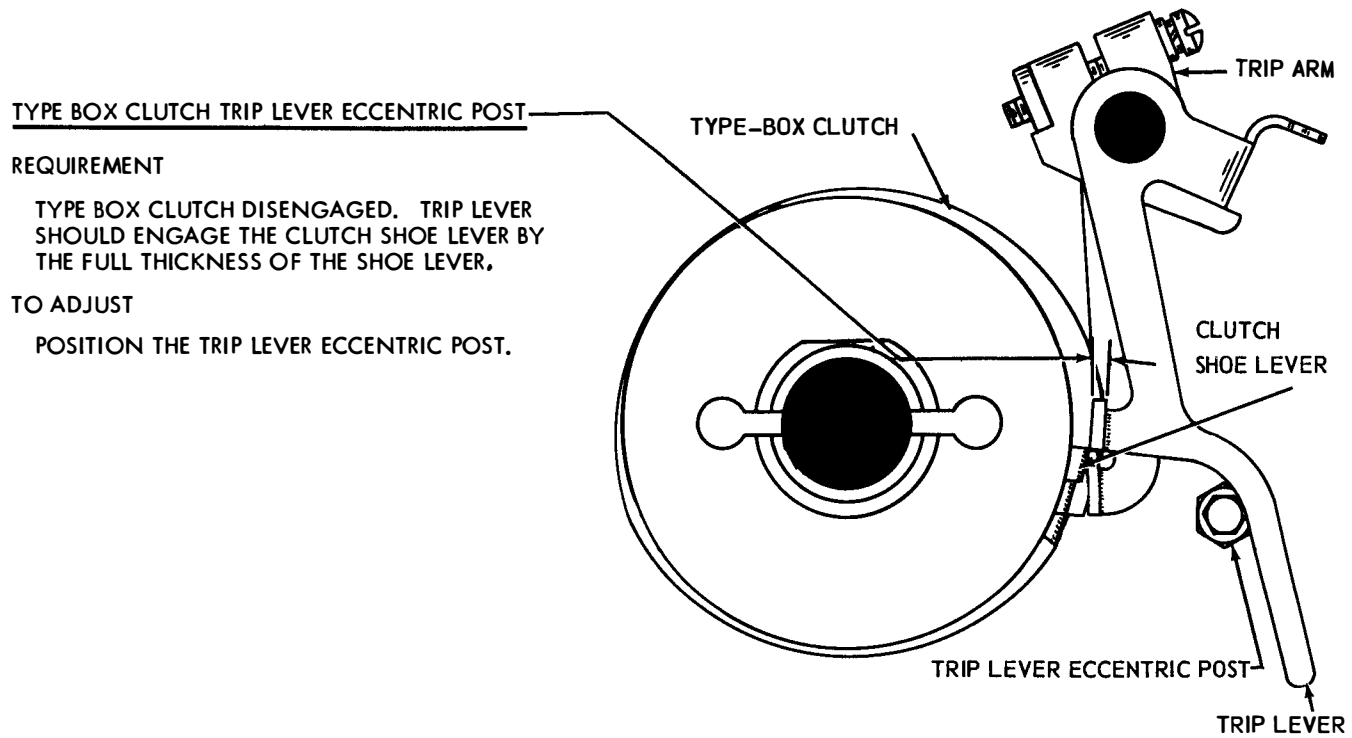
A. Automatic Typewriter, Type Box Clutch
